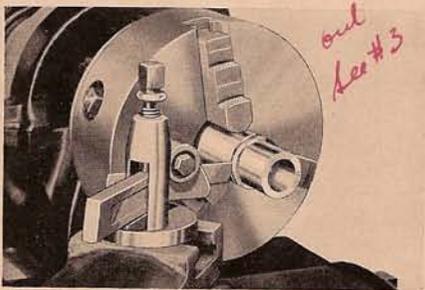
Cutting-off a Bushing Made Complete in one Set-up, in Chuck.
